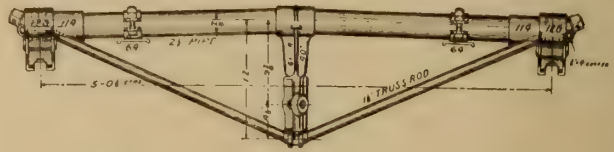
NATIONAL HOLLOW, AUTOMATIC ADJUSTABLE SPRING HEAD, 2 1/2 IN. BEAM FOR FOUR WHEEL PASSENGER TRUCKS.
